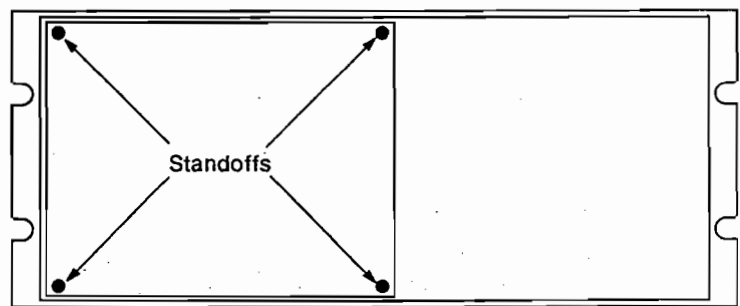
Attaching the 7B Series Backplane to the Rack-Mount Panel
